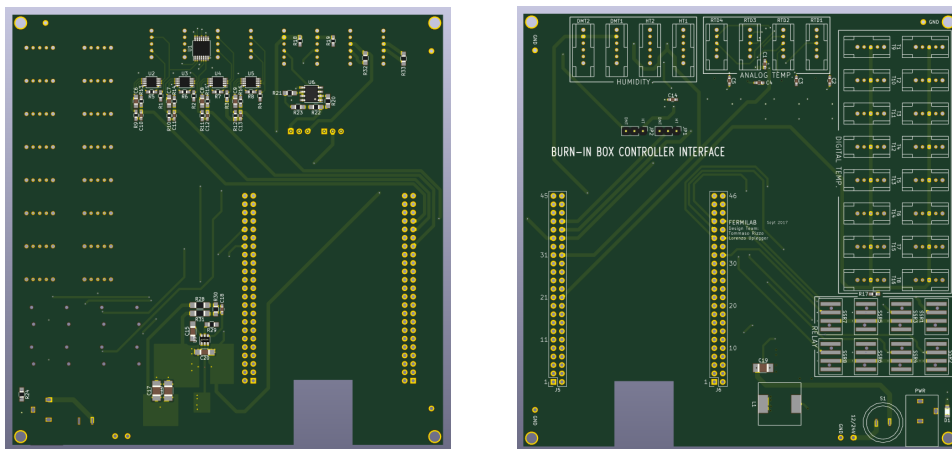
Front and back faces of the Interface Board shown with KiCAD 3D viewer
